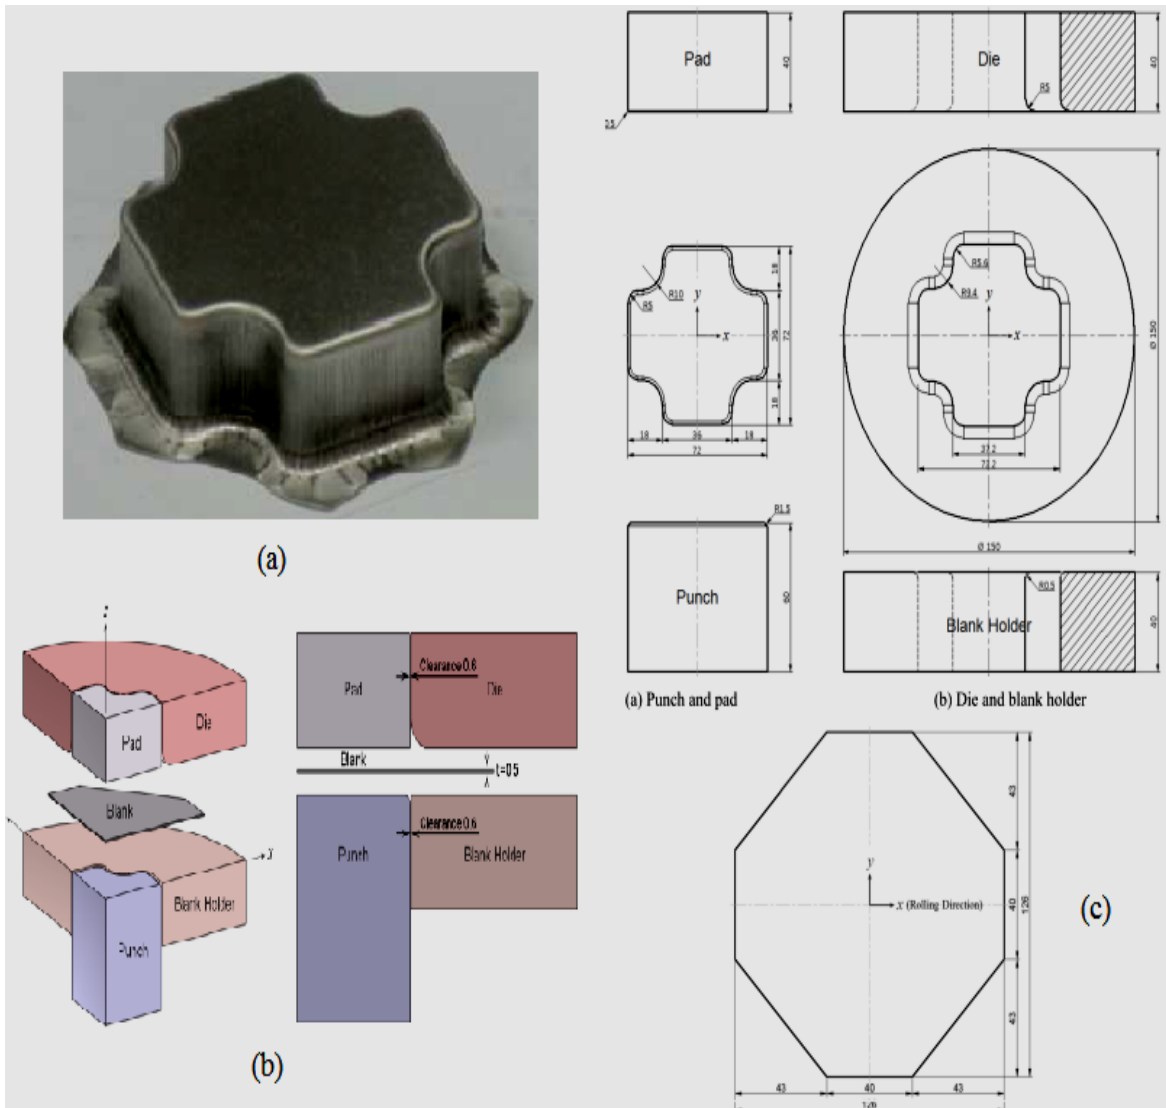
(a) A cross-shaped deep-drawn cup, (b) Schematic view of the cross-shaped cup deep drawing process, (c) Geometry of the tools and the initial blank [9]
